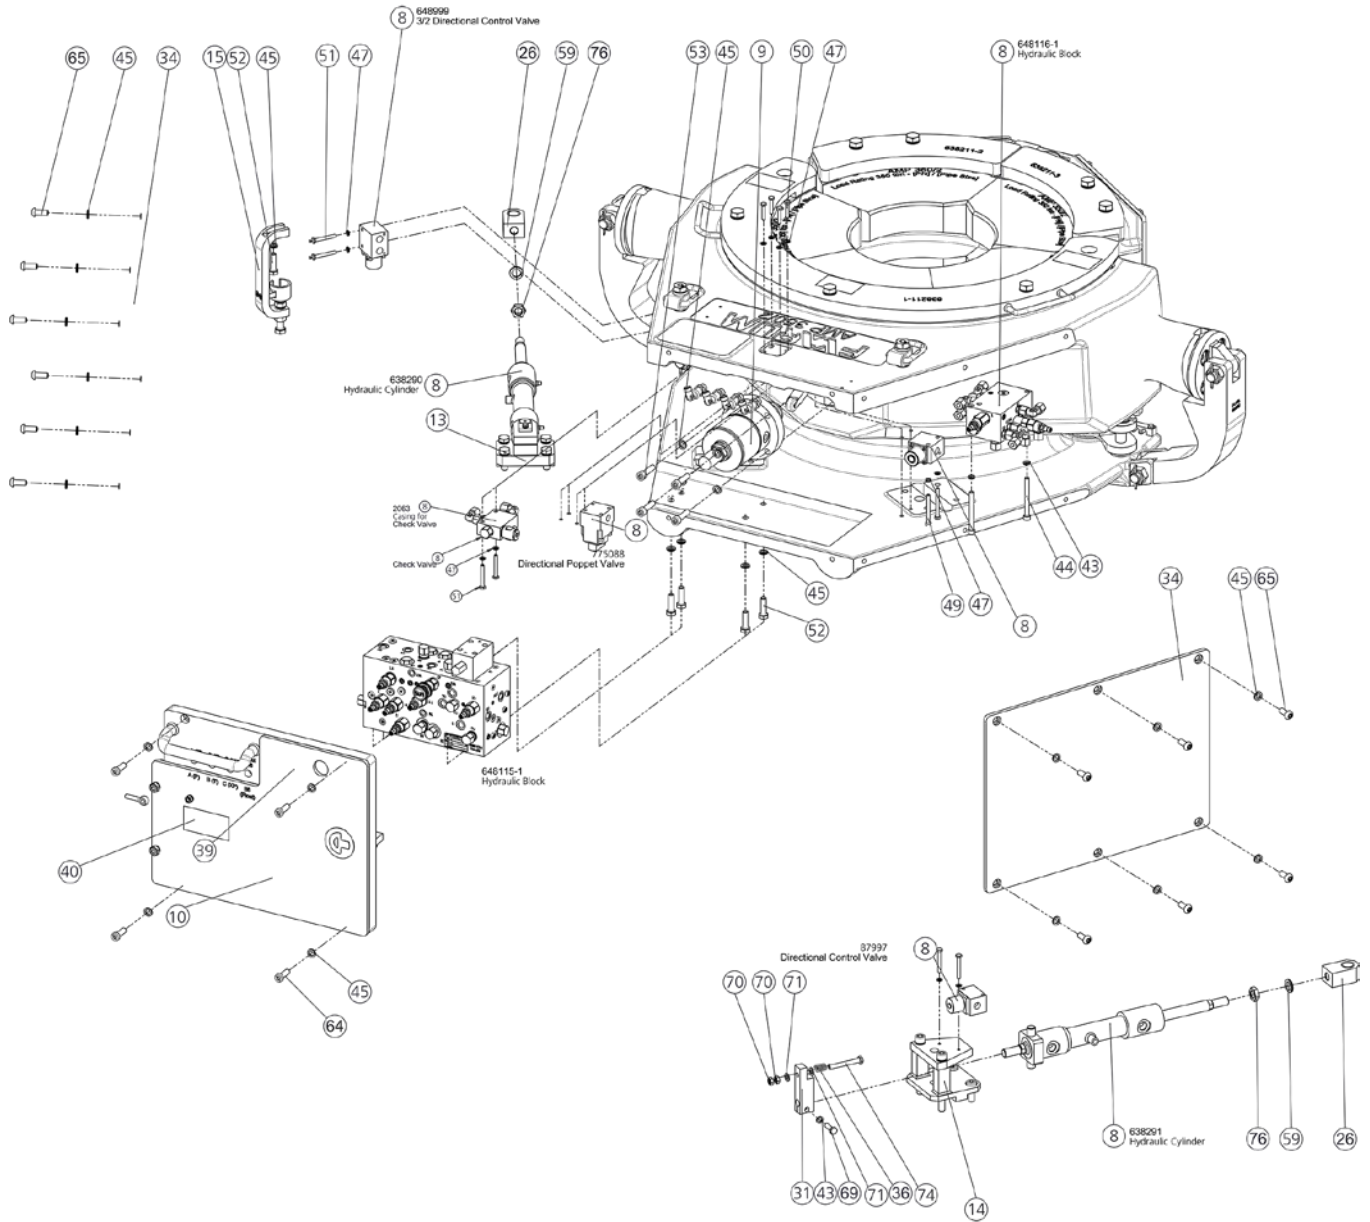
638200-Y AMP®-350/2 Drawing II
